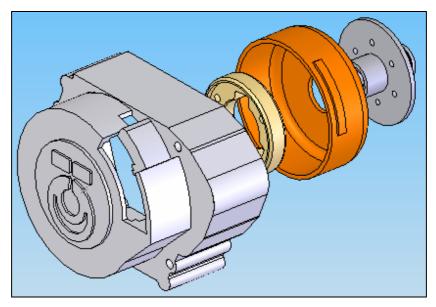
The exploded view showing the ignition system enclosed in the engine's front cover
